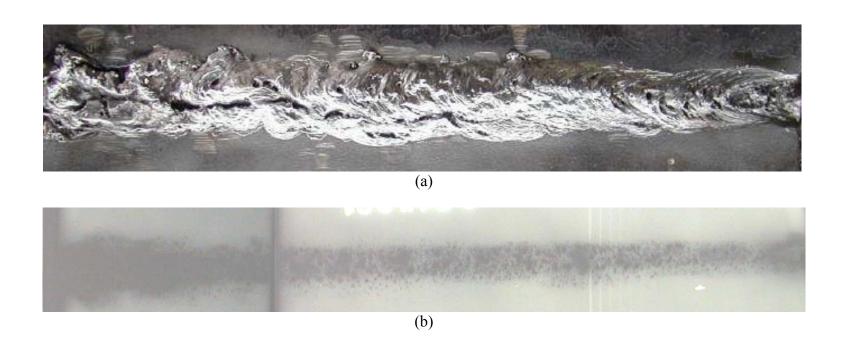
(a) V-groove wet weld deposited with E7024 electrode type on A36 steel at 100 m and (b) its radiographic image.
